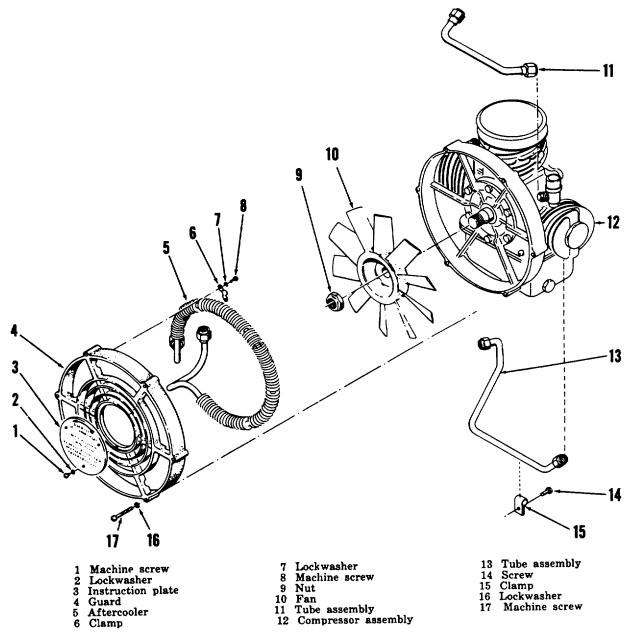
Fan, fan guard, and aftercooler, exploded view.
